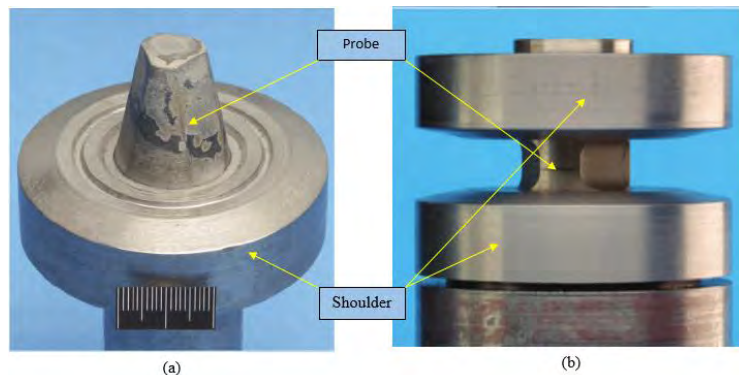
1 : Differences between CFSW and BFSW (a) conventional friction stir welding, (b) bobbin friction stir welding (Thomas et al., 2009)
